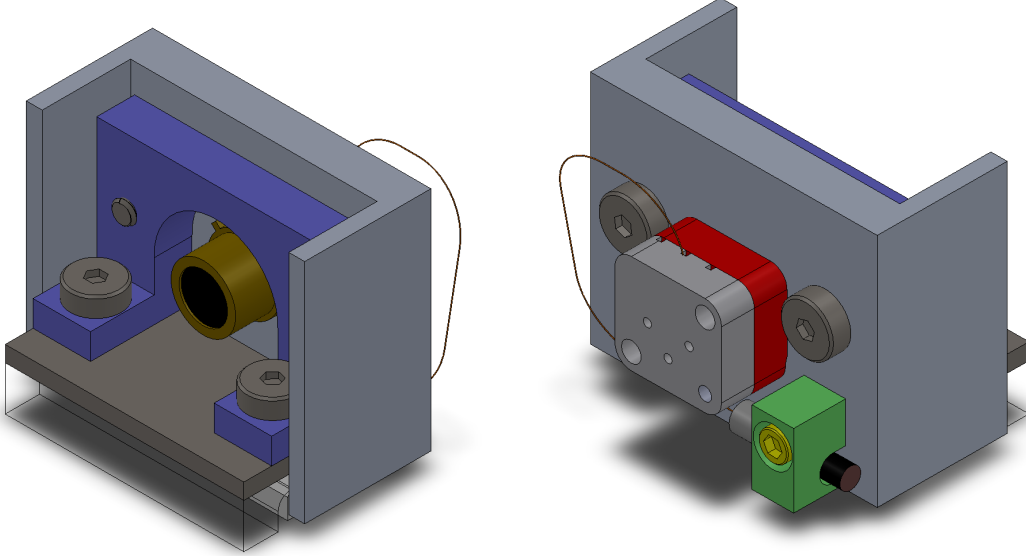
The diode mounting assembly consists of a glass block attached to the OMC, a pre-aligned base, and a carrier. The *base* (dark blue) is attached to a glass mounting block (clear) using two shoulder bolts, a barely visible peek nut plate, and an shim (dark grey). The diode (gold) is permanently attached to the U-shaped *carrier* (light grey). The carrier is then aligned and attached to the base with shoulder bolts. The cable connects to the diode with a PEEK connector (red and grey) and the cable is strain relieved (green).
